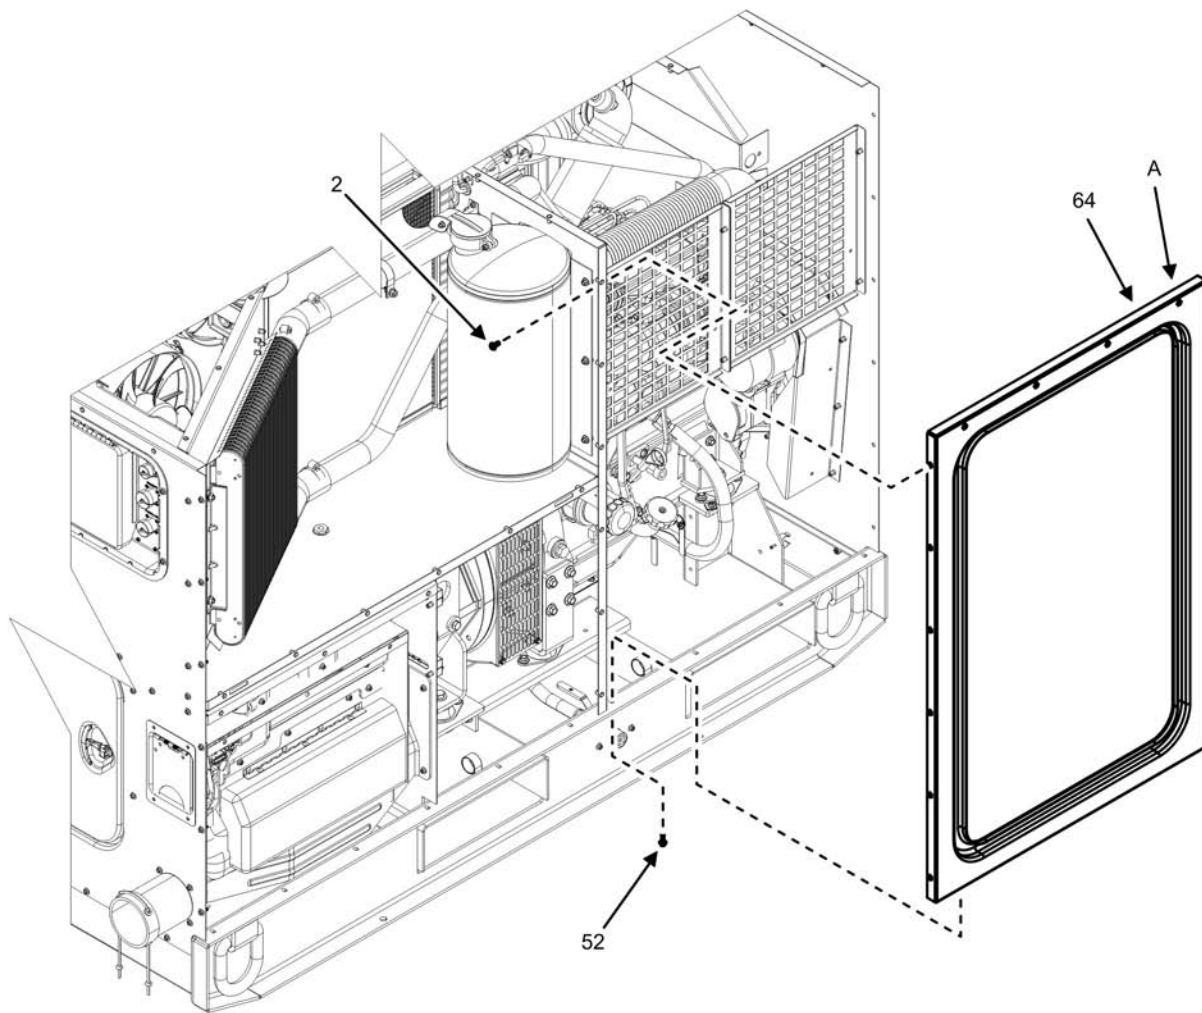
Housing Installation (Sheet 12 of 16, Right-Side Shown).
